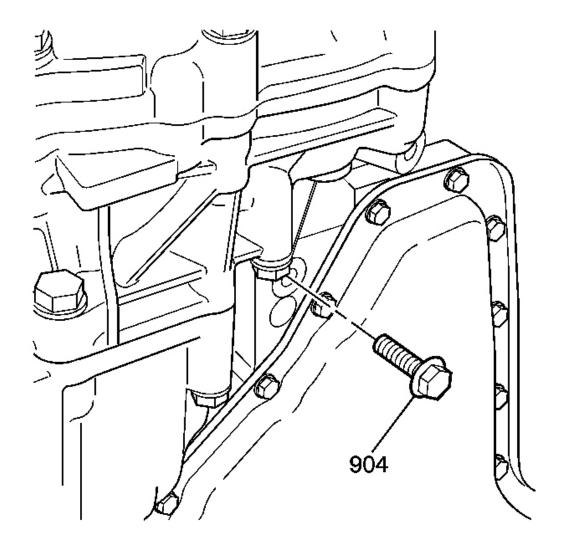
Identifying Transfer Case Lower Brace To Case Bolt Courtesy of GENERAL MOTORS CORP.
